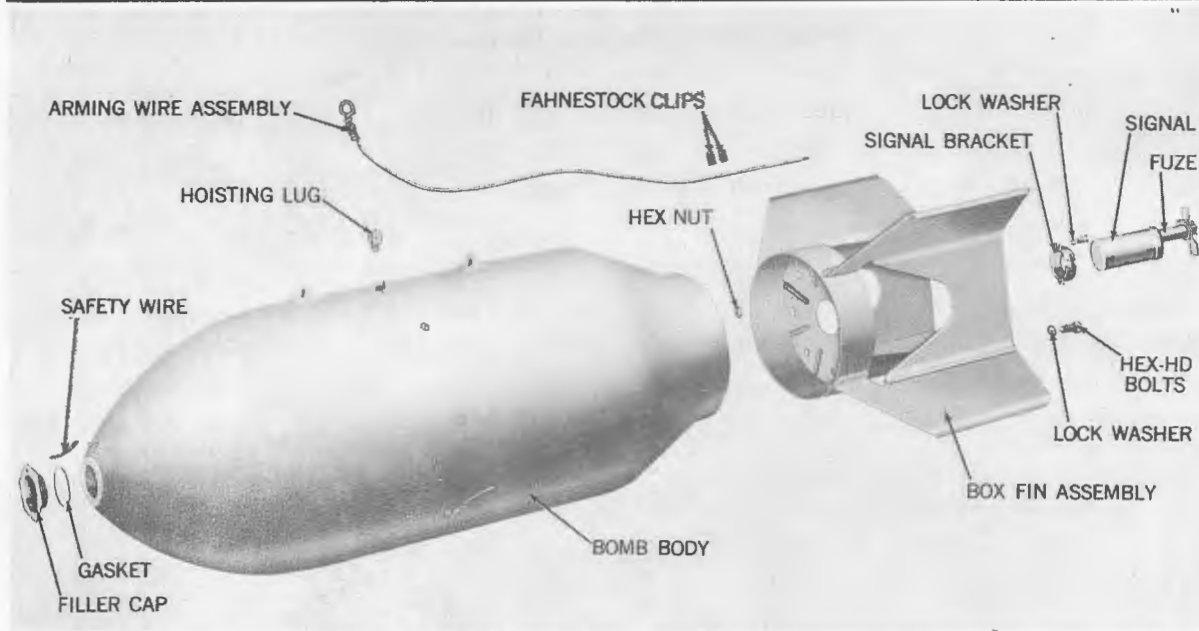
1000-lb Practice Bomb Mk 66 Mod 0, Exploded View.
